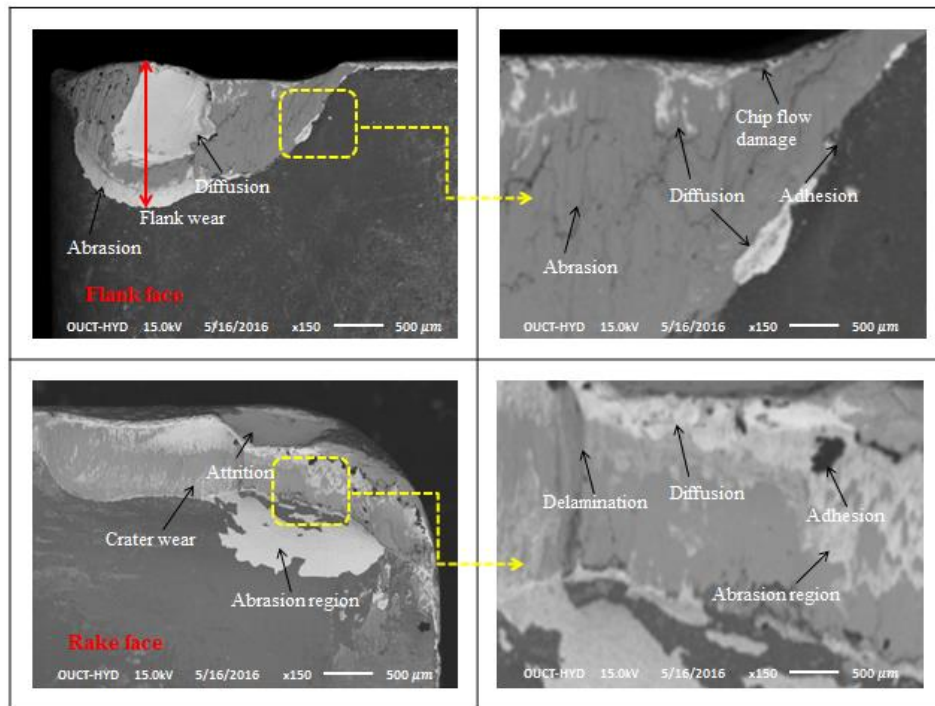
SEM images of cutting tool in dry machining condition at cutting speed 100 m/min
